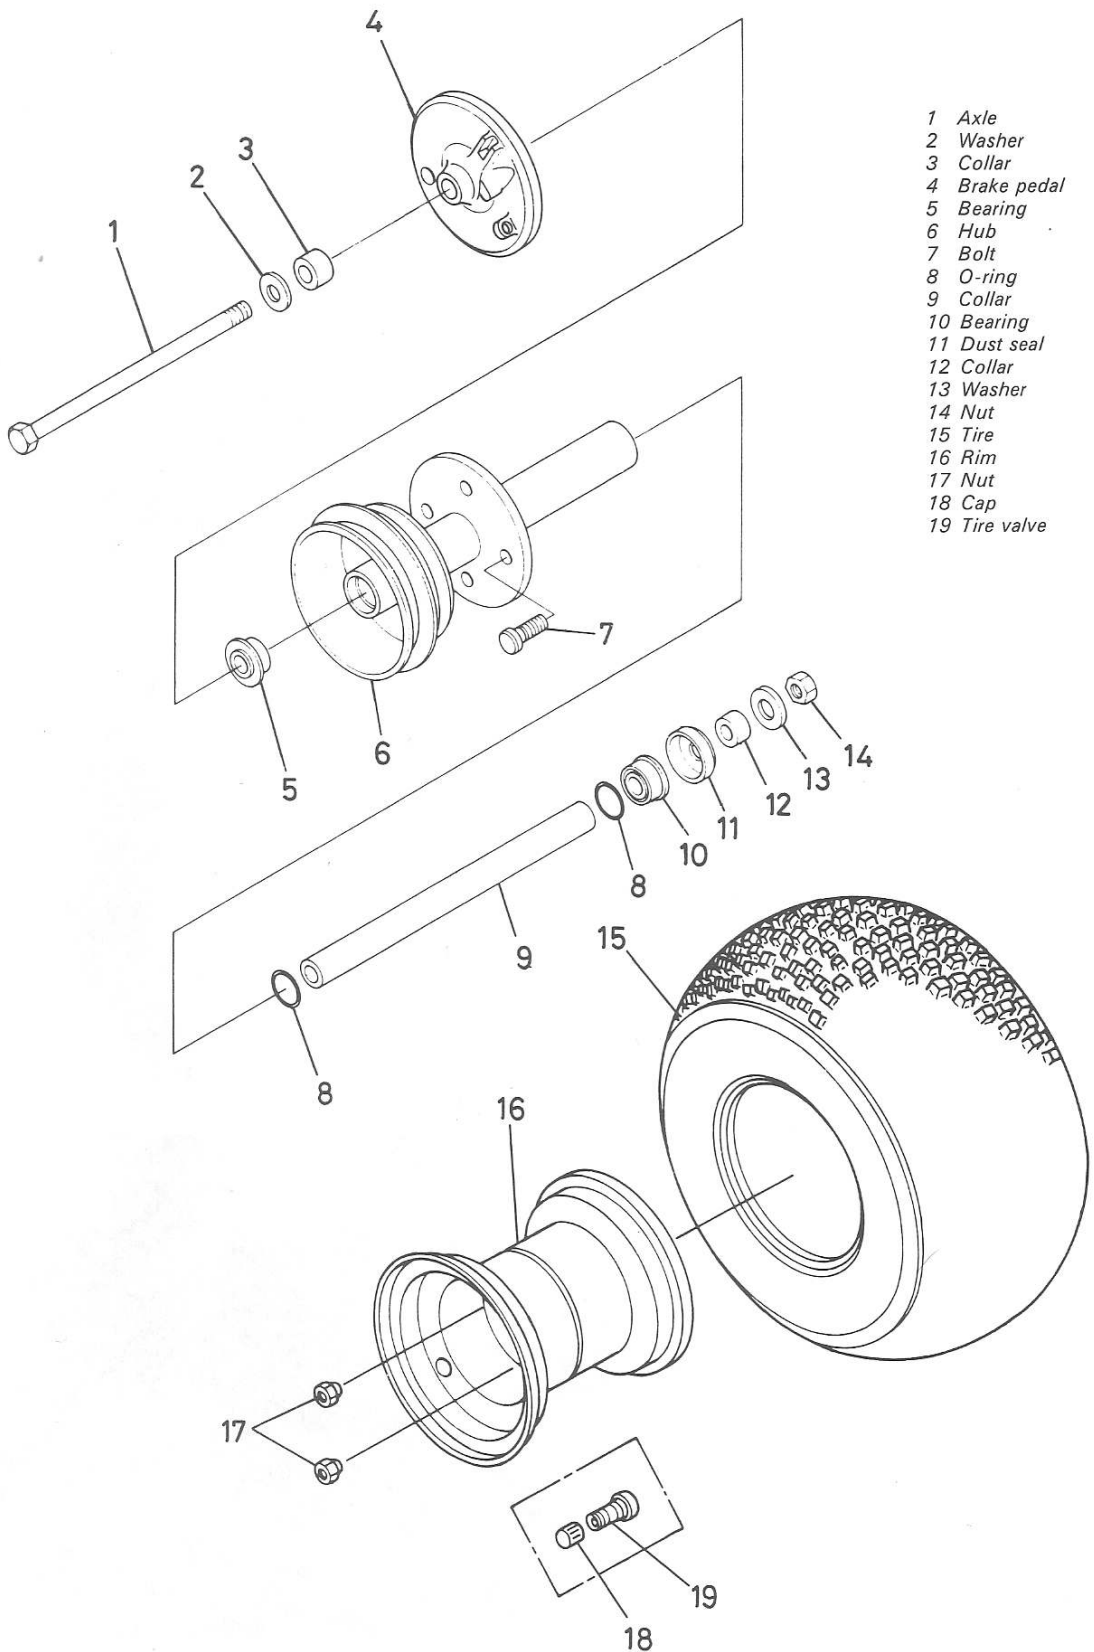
Front wheel – KLT110, 200 and 250 models (Sec 2)
